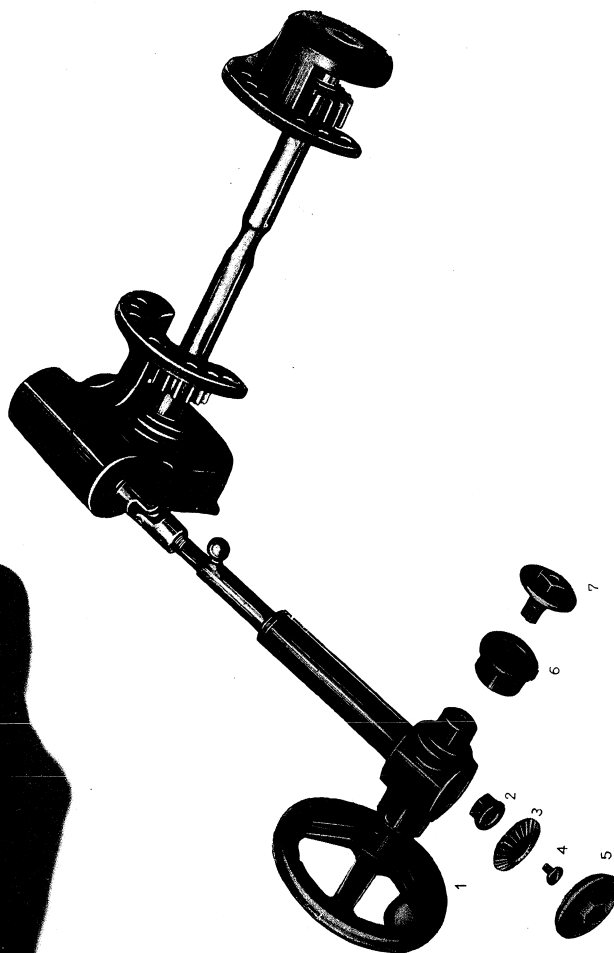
ELEVATING MECHANISM WHEEL — DISMANTLED
